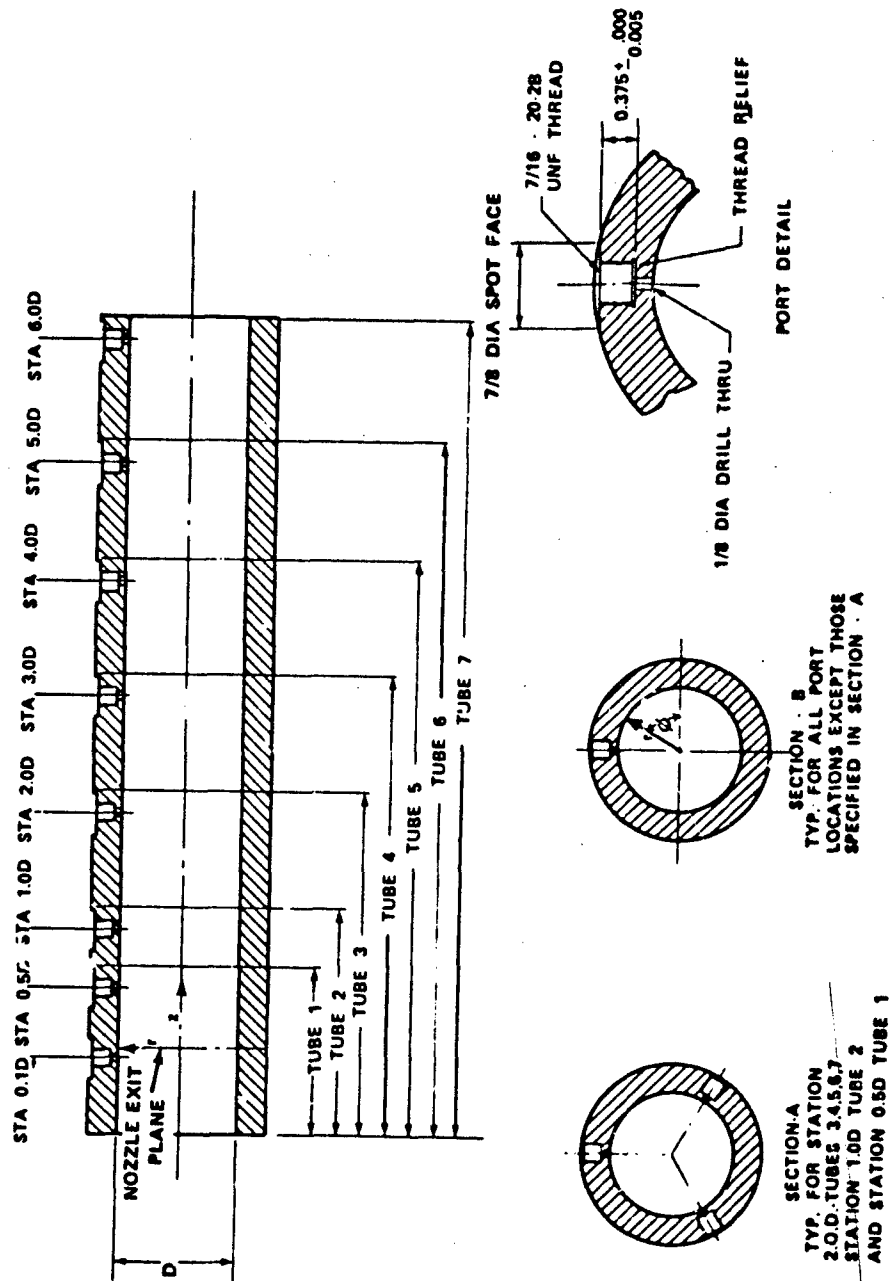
Cylindrical Tubes Showing Static Pressure Port Detail
